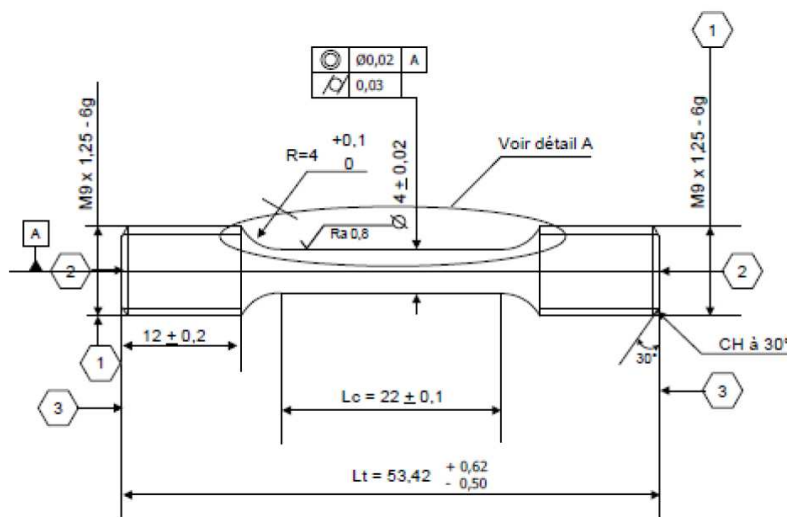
Geometry and sizes of the specimen in millimeters (courtesy of Safran Aircraft Engines).
